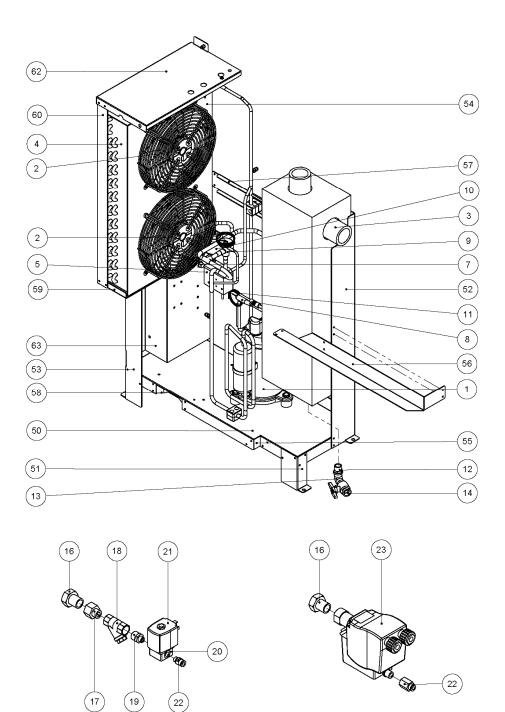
EXPLODED VIEW VS25, VS30 & VS40 DRYER MODULE
